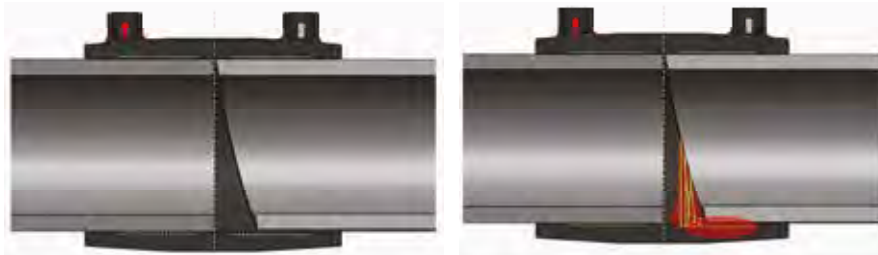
Mis-cut assembly if pipe not cut to square
